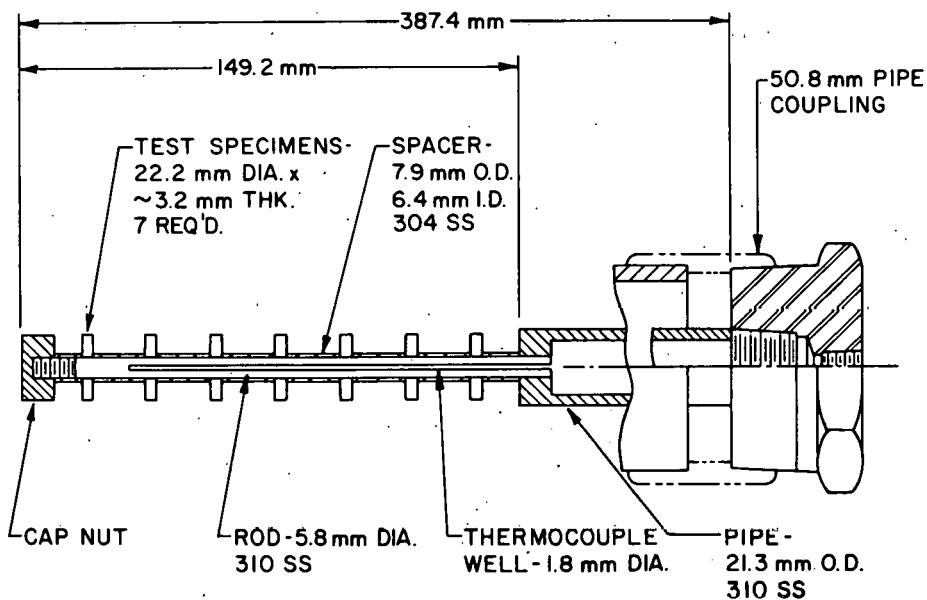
Schematic of Uncooled, Coupon-Type Corrosion Probe
